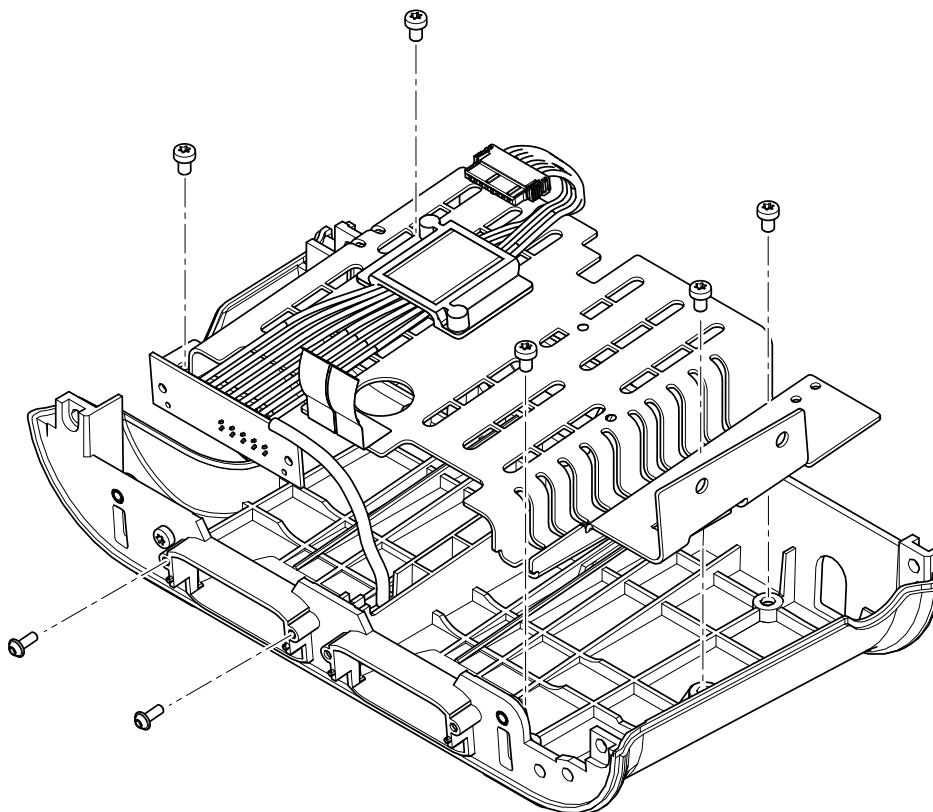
Battery Connector Board and mounting plate (HAMILTON-C1 since SN6000)
